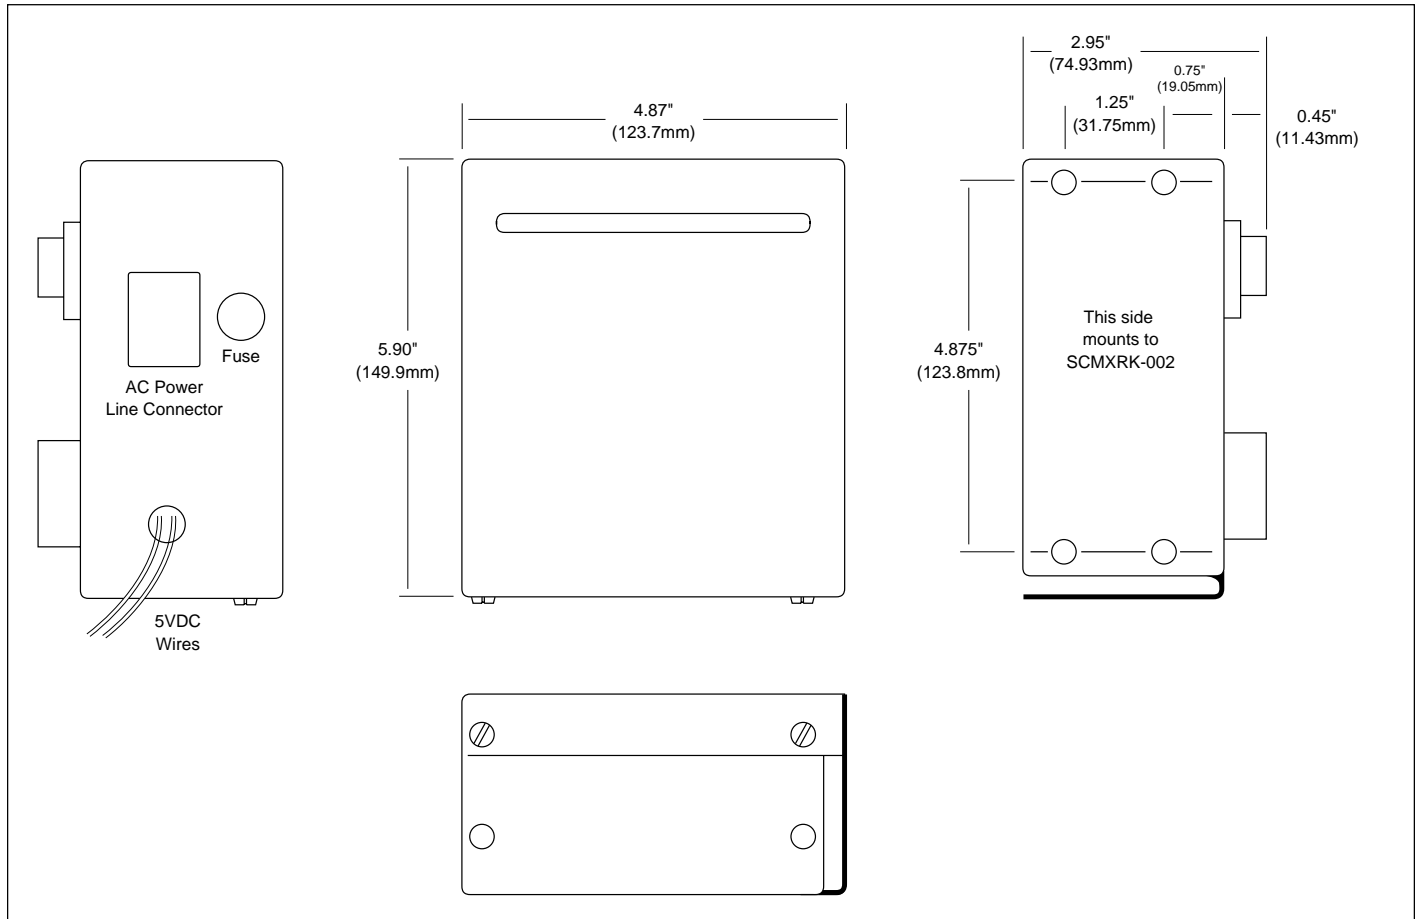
SCMXPRT-003/E-003 Physical Dimensions.
